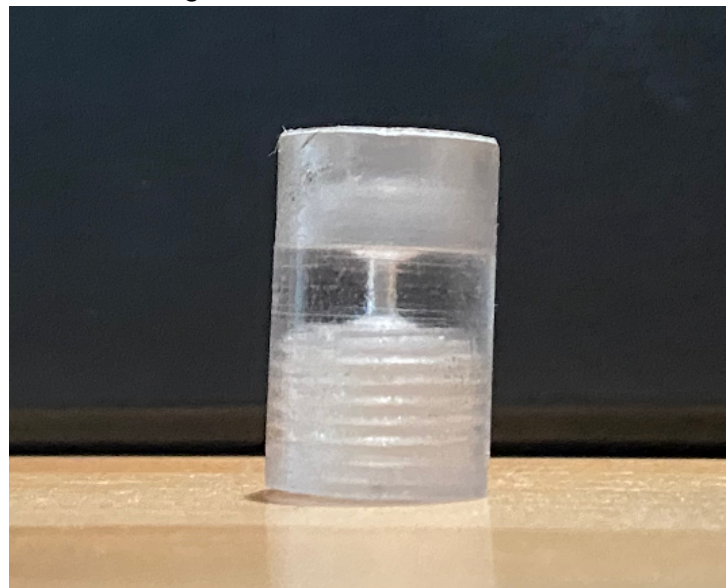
Shower Head Nozzle manufactured through Polyjet Printer (Material: VeroClear) and Manual CNC (Material: HDPE).
